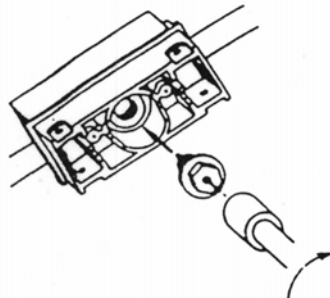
Mounting the Conductor Probe on a Coaxial Cable
